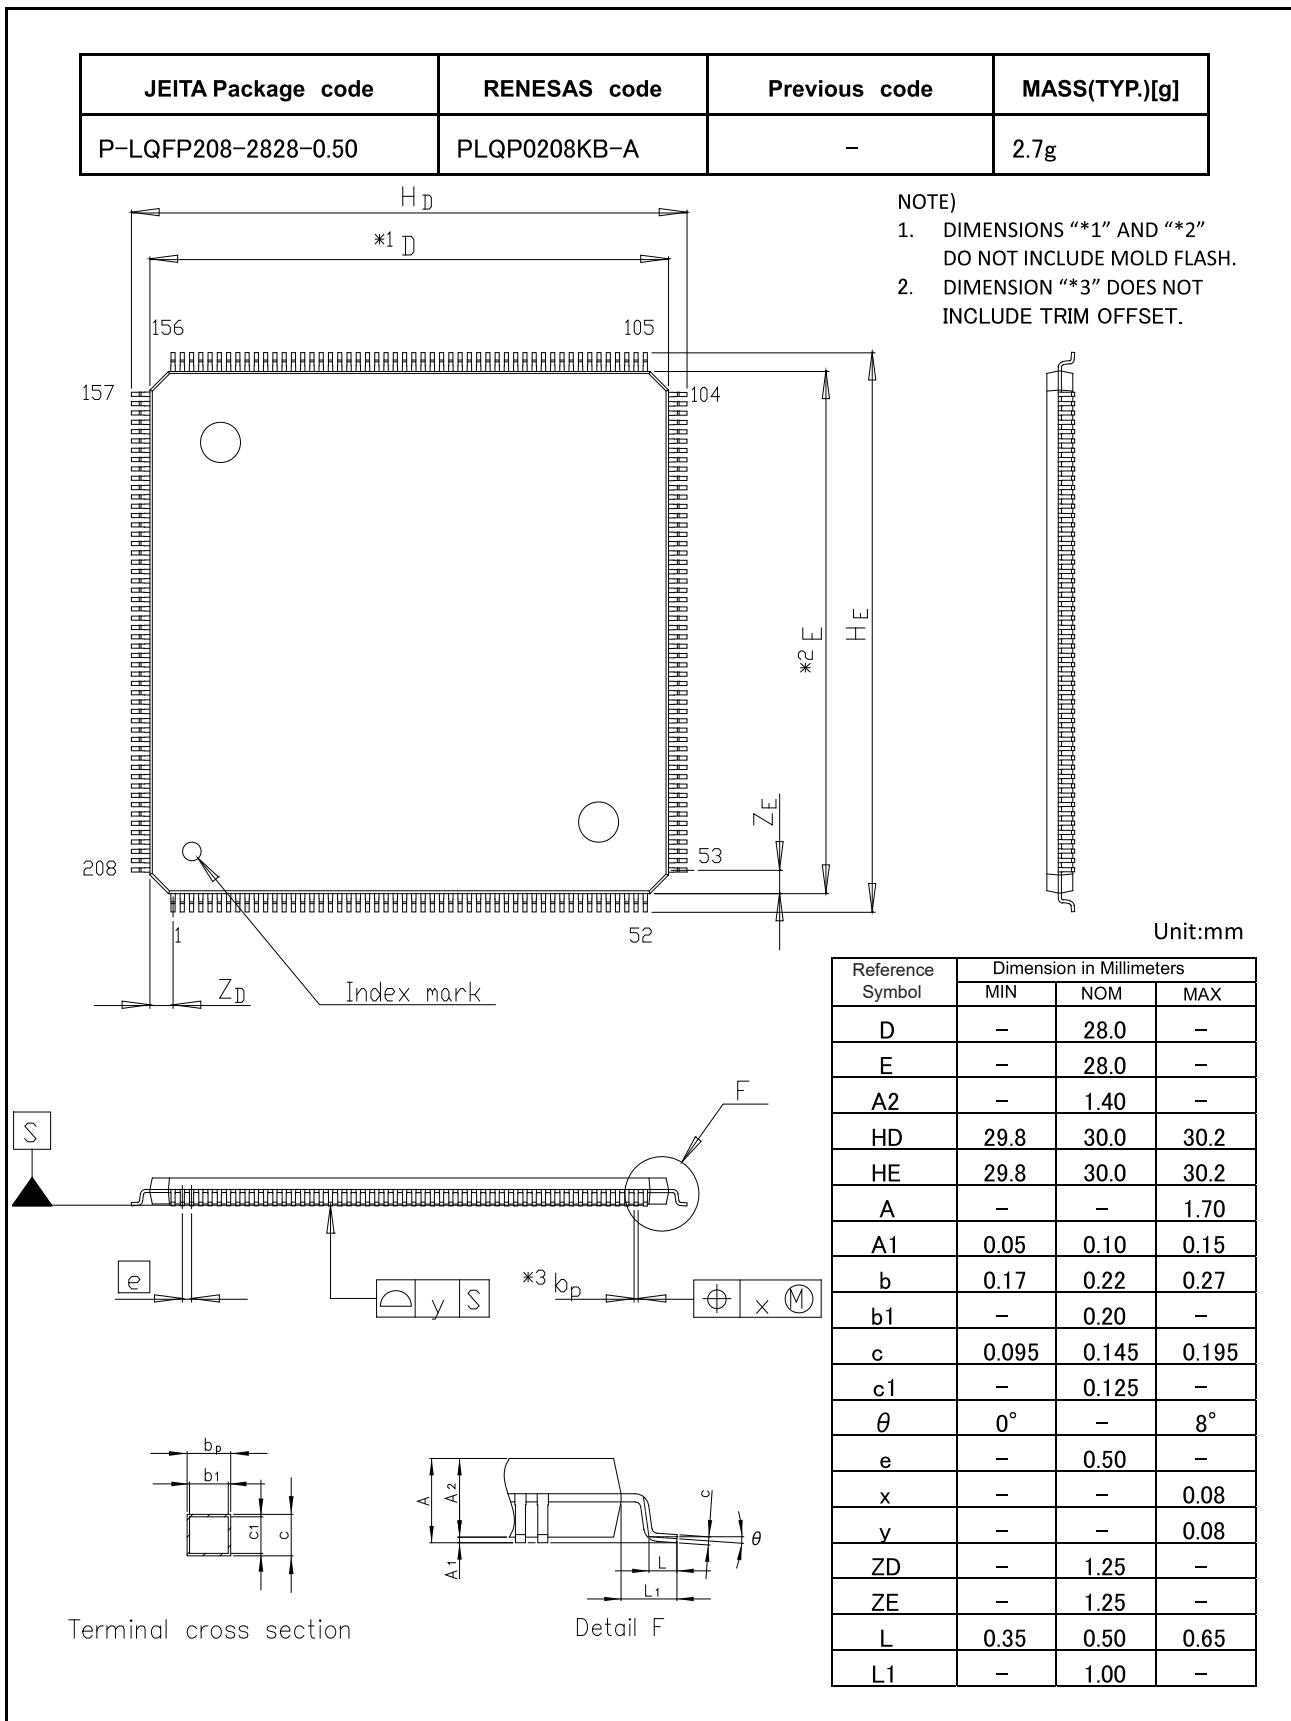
Dimensions of 208-Pin QFP Package (PLQP0208KB-A)
